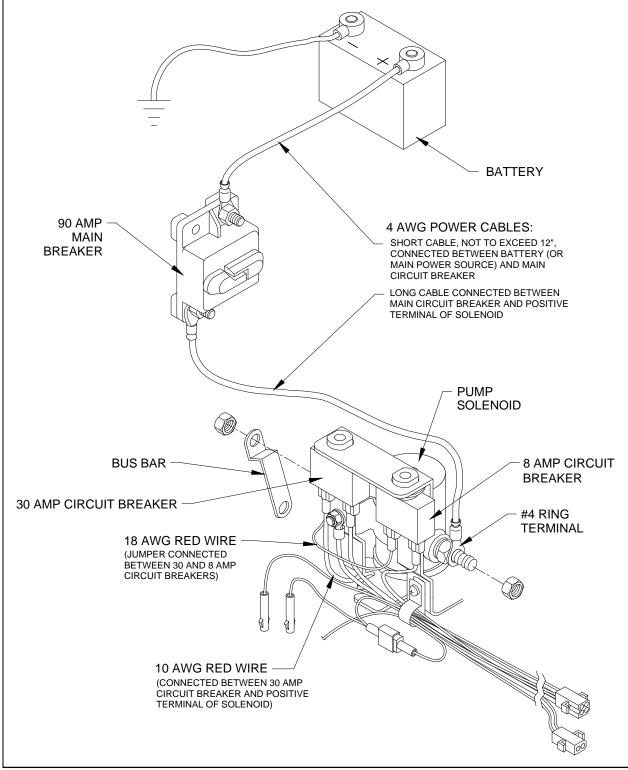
ELECTRICAL INSTALLATION DIAGRAM
